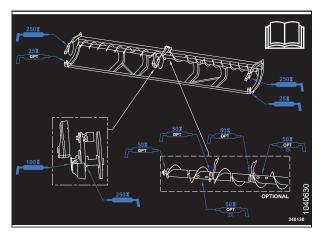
Decal for Double-Knife Header with Three-Piece Upper Cross Auger
